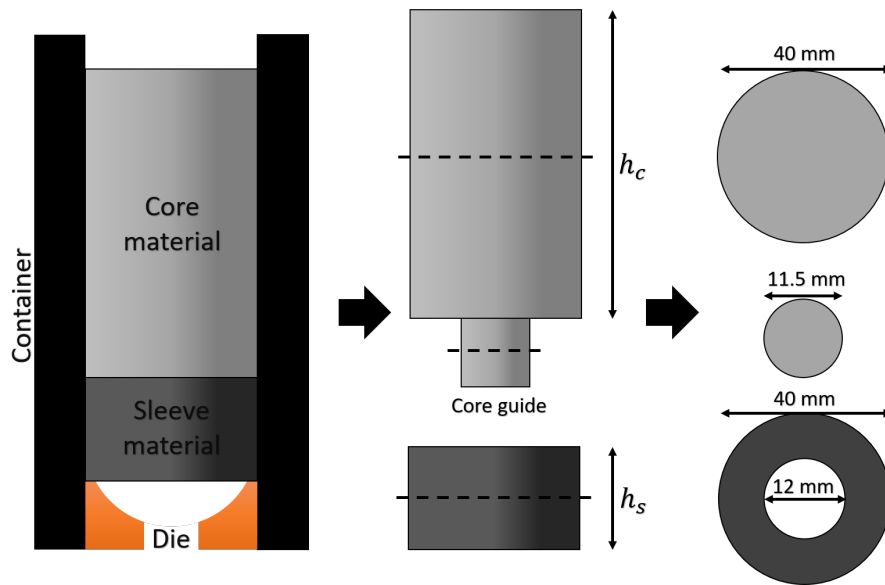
Illustration of the dimension used for the co-extrusion process where h_s is the initial height of the sleeve material, h_c is the initial height of the core.
